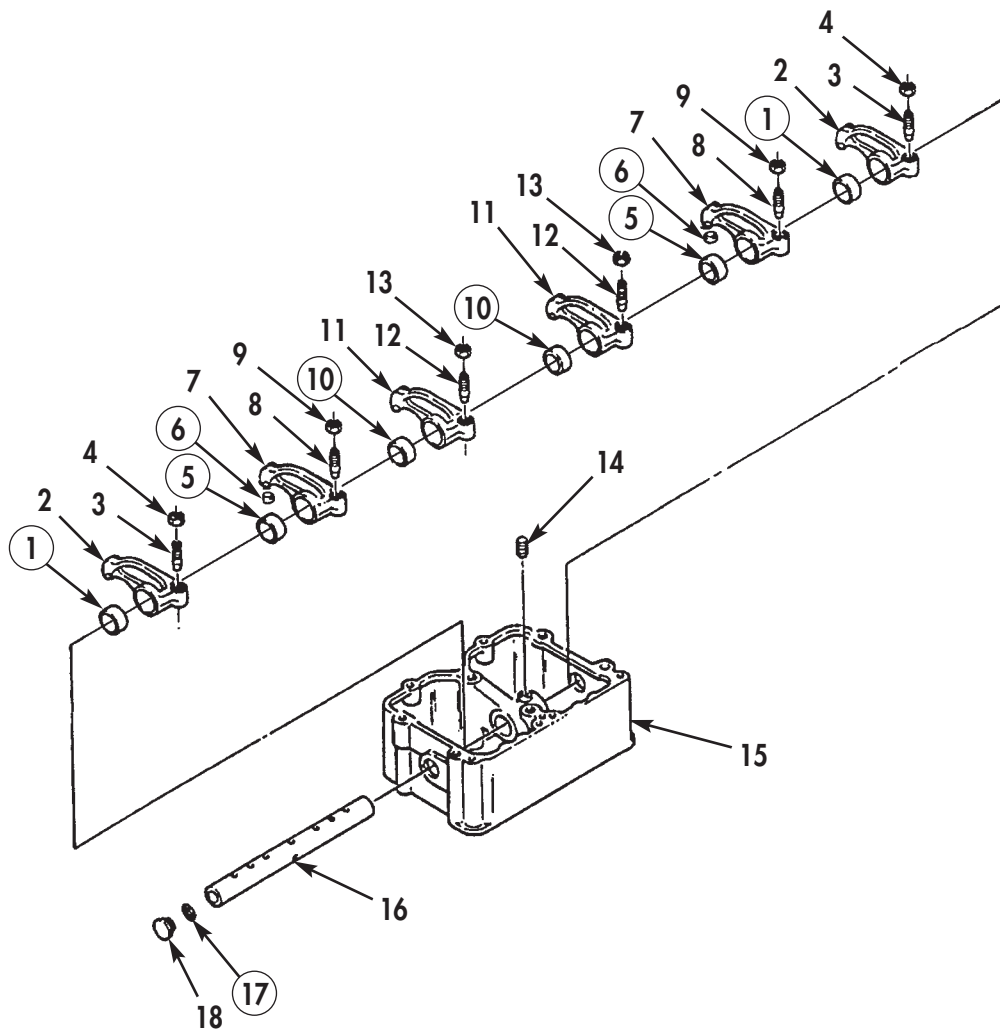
Rocker Levers and Rocker Lever Housing Disassembly.
